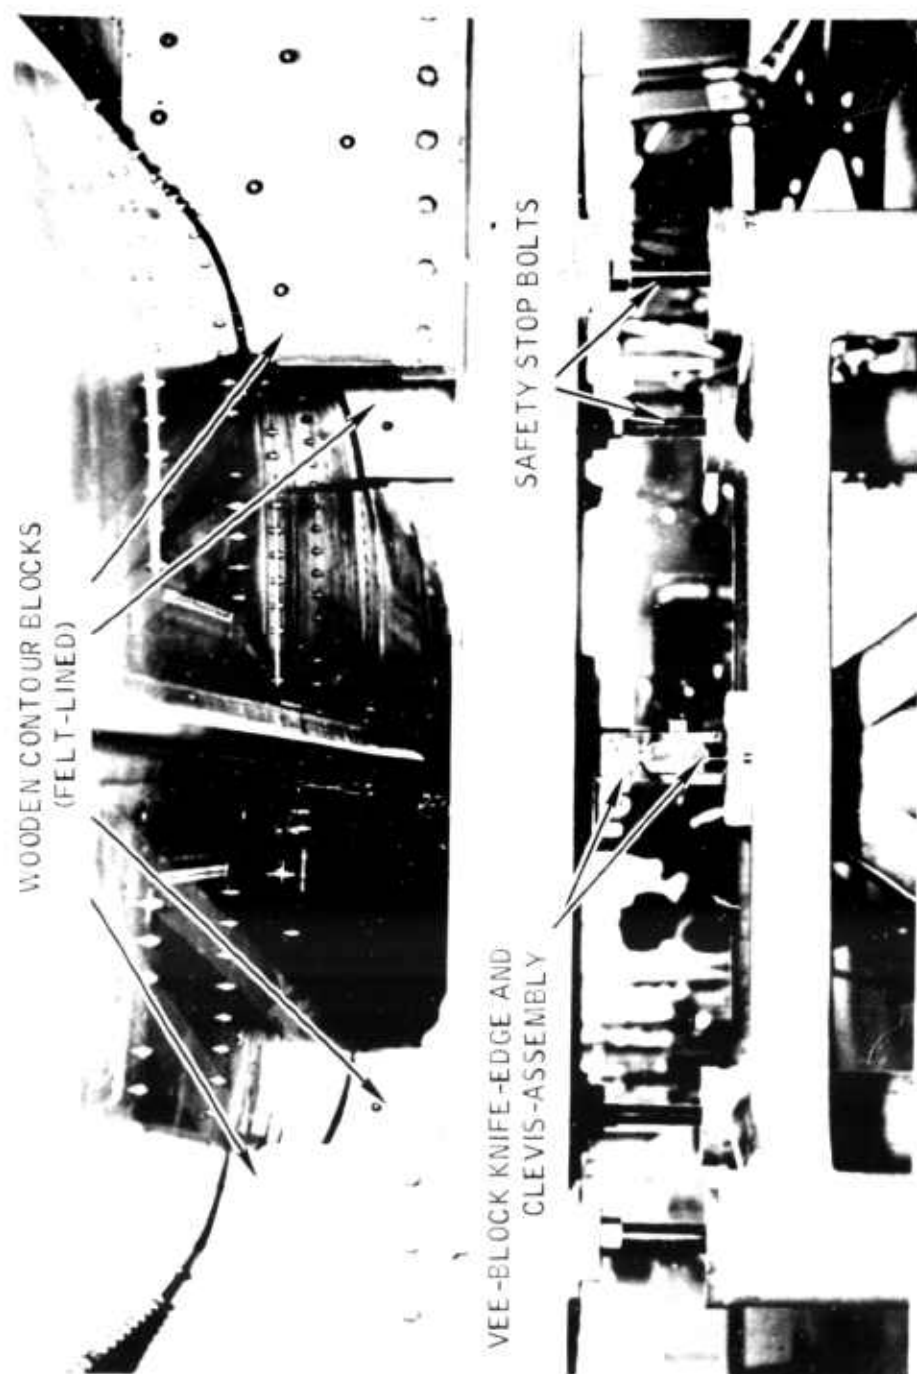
Roll condition: aft fuselage knife-edge. Assembly and safety support
